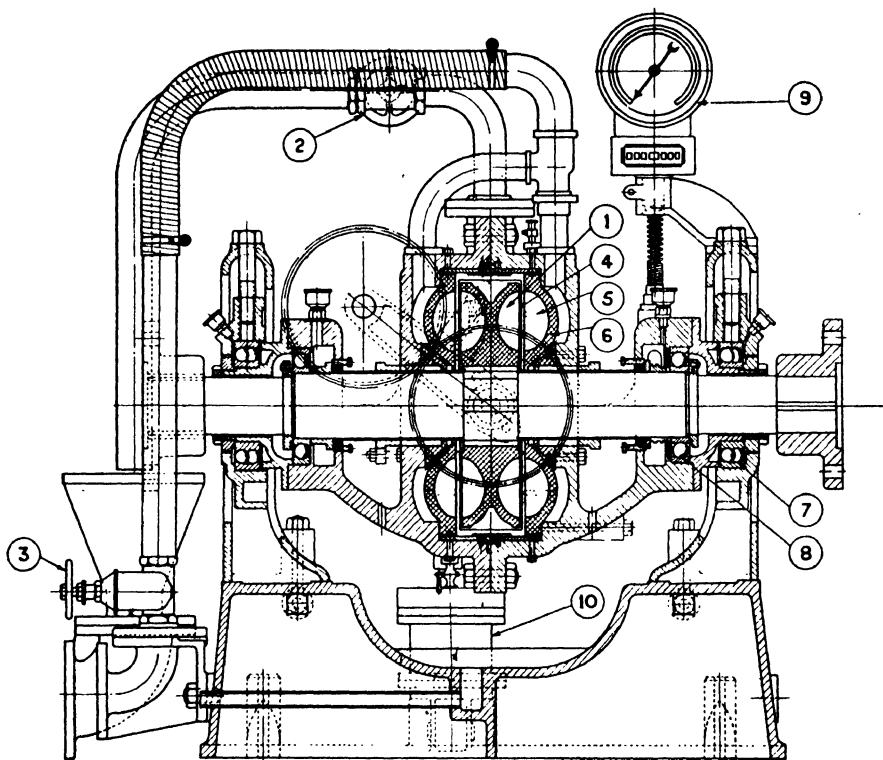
Cross-section through casing of Froude dynamometer.
